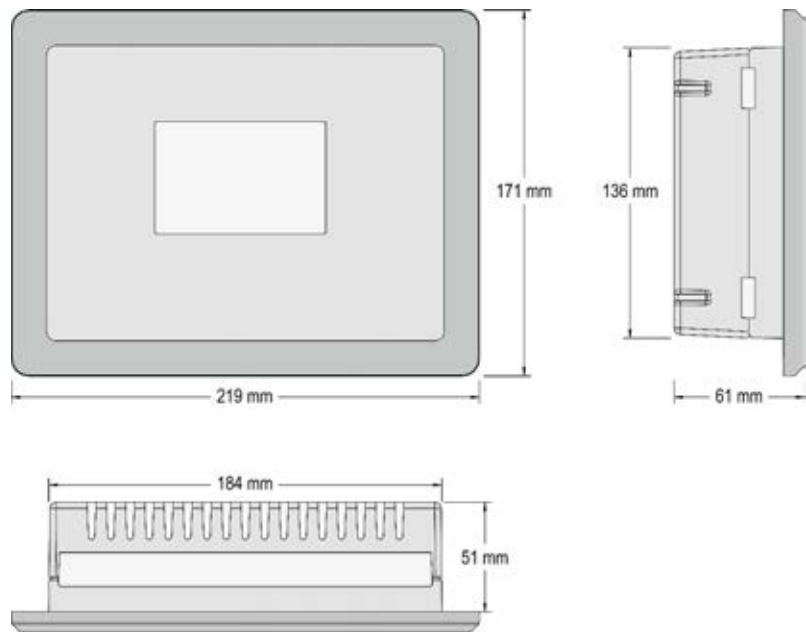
Plastic housing - dimensions (easYgen-2200/2300)
